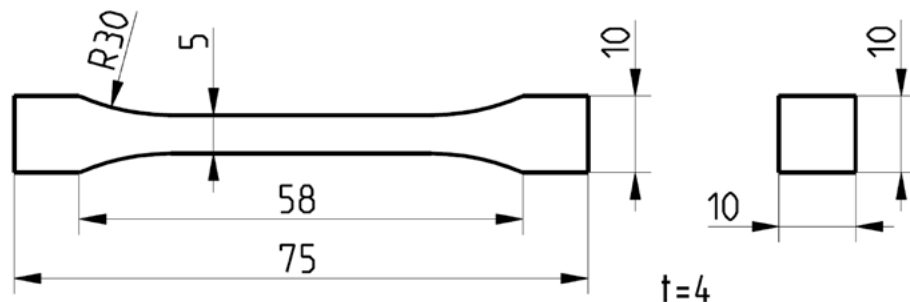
Tensile test specimen (left) and swelling test specimen (right).
